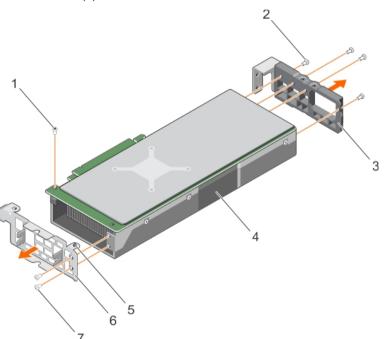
Removing the custom AMD I/O brackets and the support brackets
